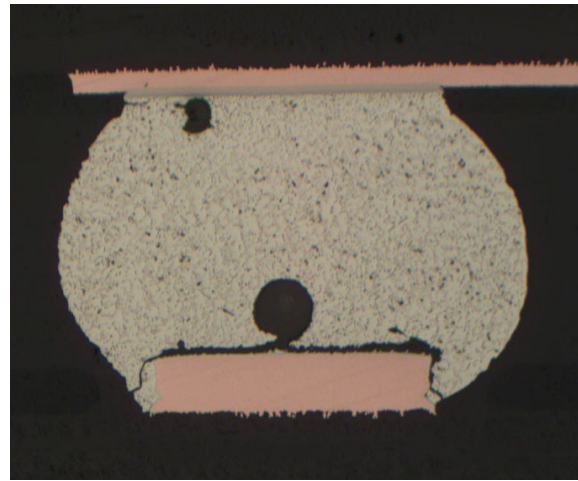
Examples of BGA Solder Joint Interface Failure Mode for SAC305 (bottom)
